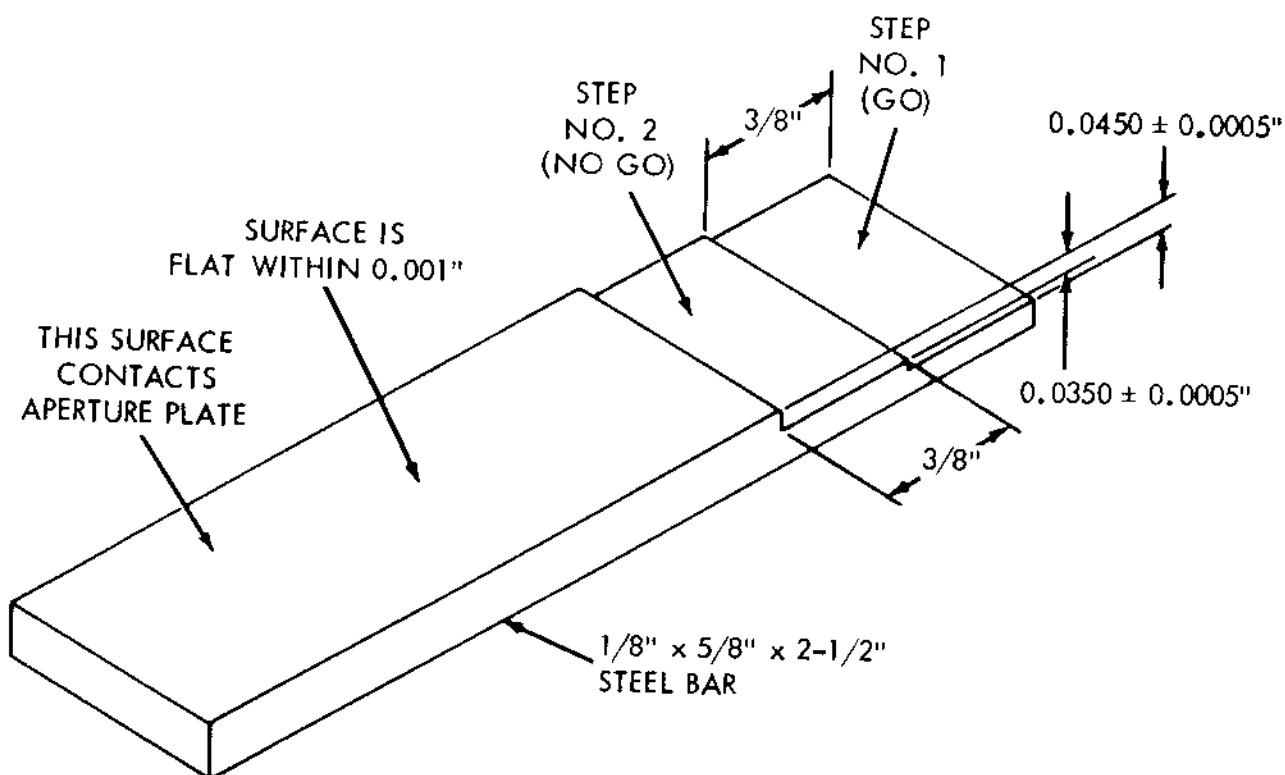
Claw Arm Protrusion Gauge (Tool No. G14-38000)
